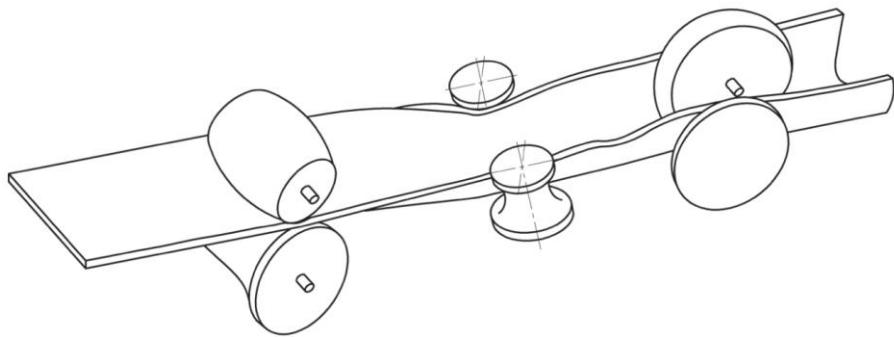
Deformation scheme of the strip in the continuous roll forming stand
